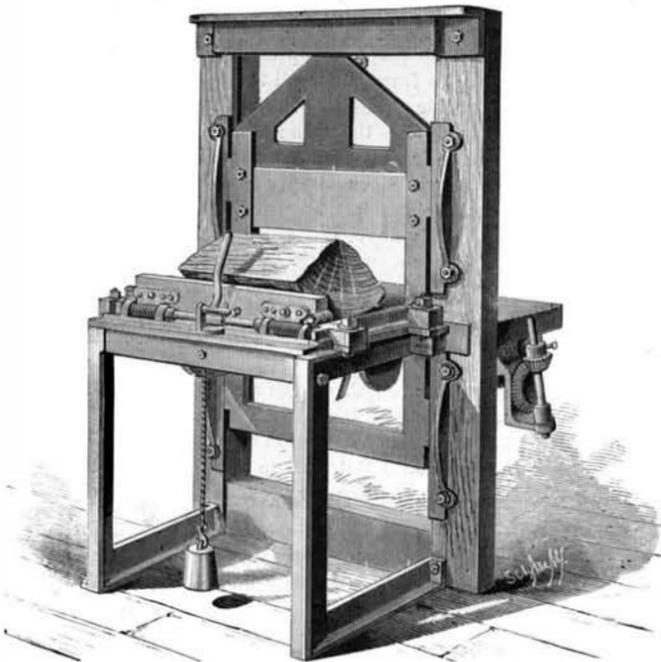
TREVOR & CO'S SHINGLE-CUTTING MACHINE.
